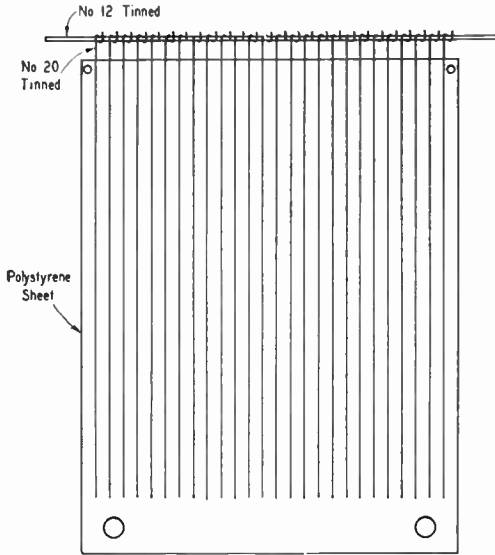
Constructional details of the Faraday shield, before soldering the ends of the No. 20 wires to the No. 12 wire bus.
